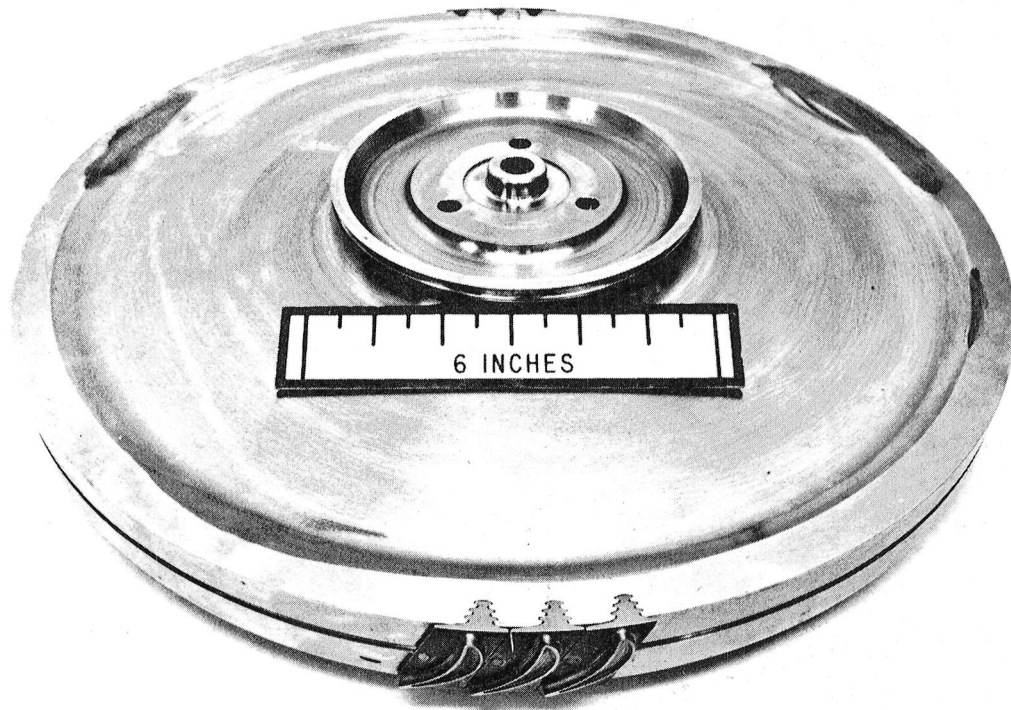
Seal Test Rig Wheel Showing MAR-M421 Alloy Stub Blades
